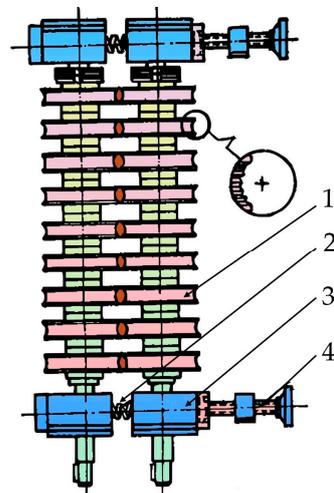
Roller structure: (1) extrusion rollers; (2) compression spring; (3) bearing seat; (4) adjusting screws.
